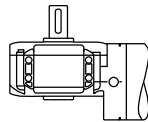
stage gearhead with left shaft end (W05) / All dimensions in mm
